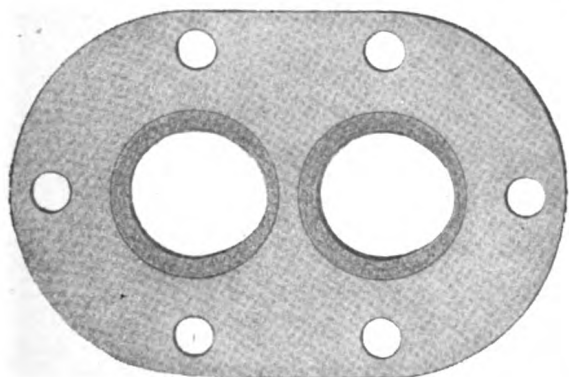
Cover plate of pump shown in Figure 4-4, showing uneven wear of bushing.
